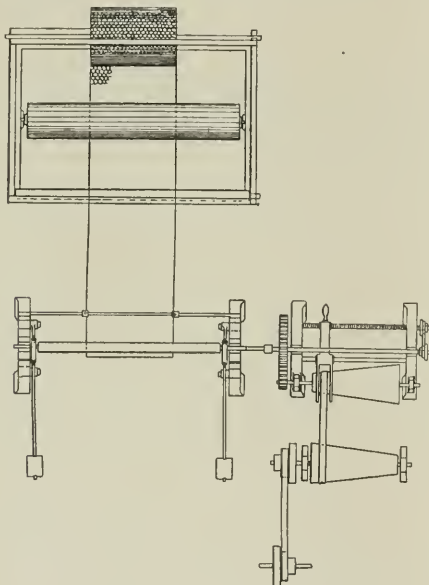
MACHINE FOR GALVANIZING WIRE NETTING.
